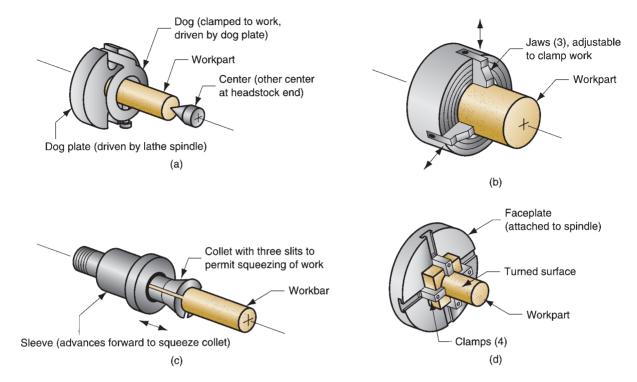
Four workholding methods used in lathes: (a) mounting the work between centers using a dog, (b) three-jaw chuck, (c) collet, and (d) faceplate for noncylindrical work parts.
